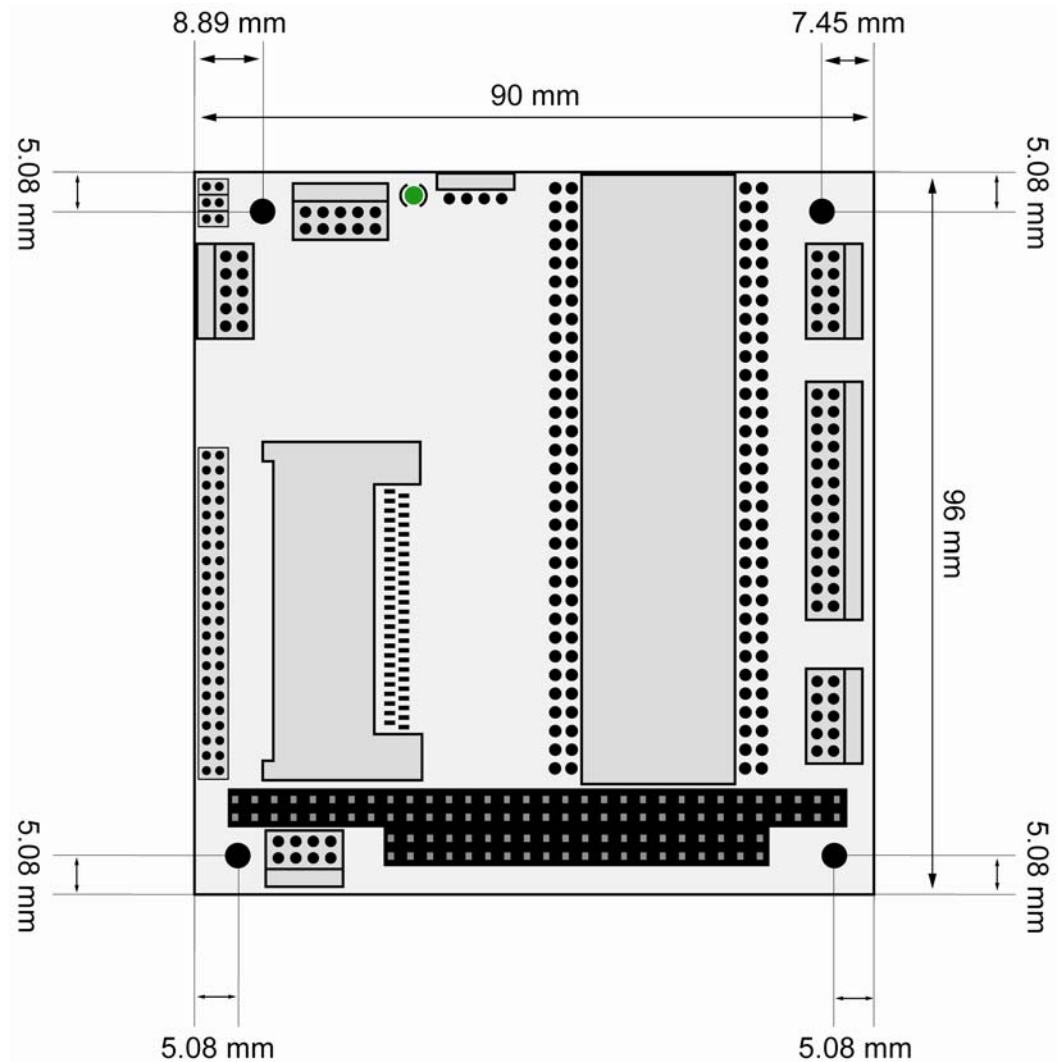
Mechanical dimensions of CP/486SX2-SV4
